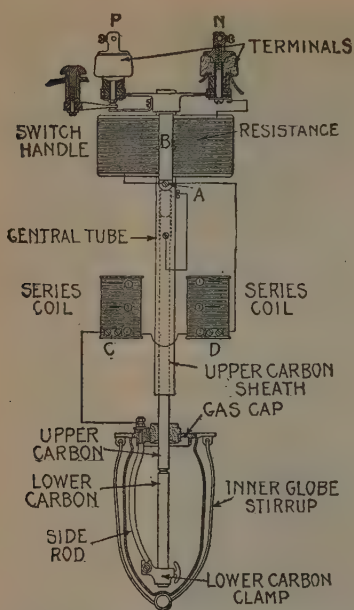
,372.—Carbon holder carrier of Fort Wayne 104 volt parallel circuit alternating current arc lamp. It consists of a long brass tube in which travels the upper carbon holder. The upper end of the tube is threaded on the inside to receive a brass screw plug which screws down flush with the top of the tube, and to which is soldered a copper spiral cable which provides a path for the current to the upper carbon. The other end of this copper spiral cable is connected to the stem of the carbon holder by means of a set screw, the stem protecting the cable from damage while trimming the lamp or replacing the carbon. The object of this plug in the top of the tube is to form a guide, by means of the counter sunk hole in the plug into which the stem of the carbon holder enters, automatically centering the carbon in the holder. The travel of this carbon holder is checked by the head of the set screw sliding in the slot of the tube, which screw also prevents the carbon holder turning.
